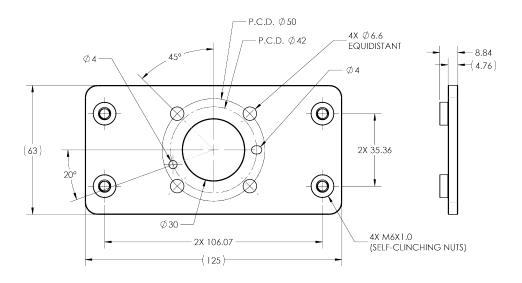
Technical Dimensions of the 0 mm Offset Plate
